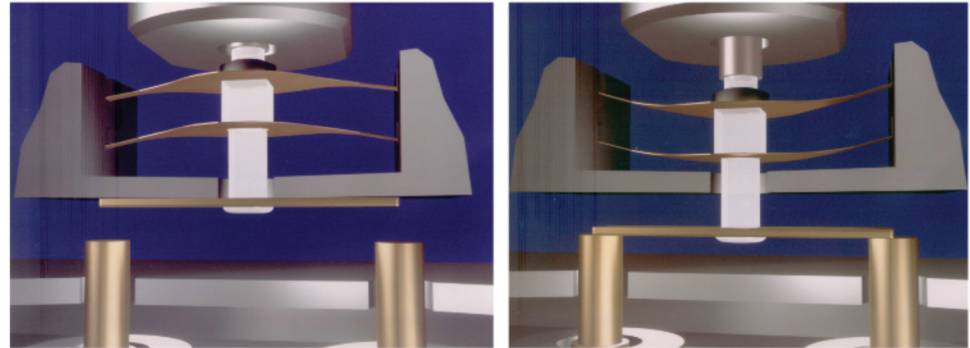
shows a cutaway view of a RAMSES coaxial switch displaying the actuator mechanism. A second improvement involves a new rectilinear actuator design using high energy magnets and a switching performance in relation to its size.
